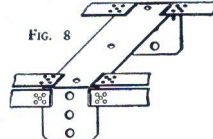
shows a double straight angle connector, C-180-D, as used to extend the length of a double boom. A similar connector, the C-180-DS, (see MORECRAFT PARTS) is used the same as the connector shown here.
